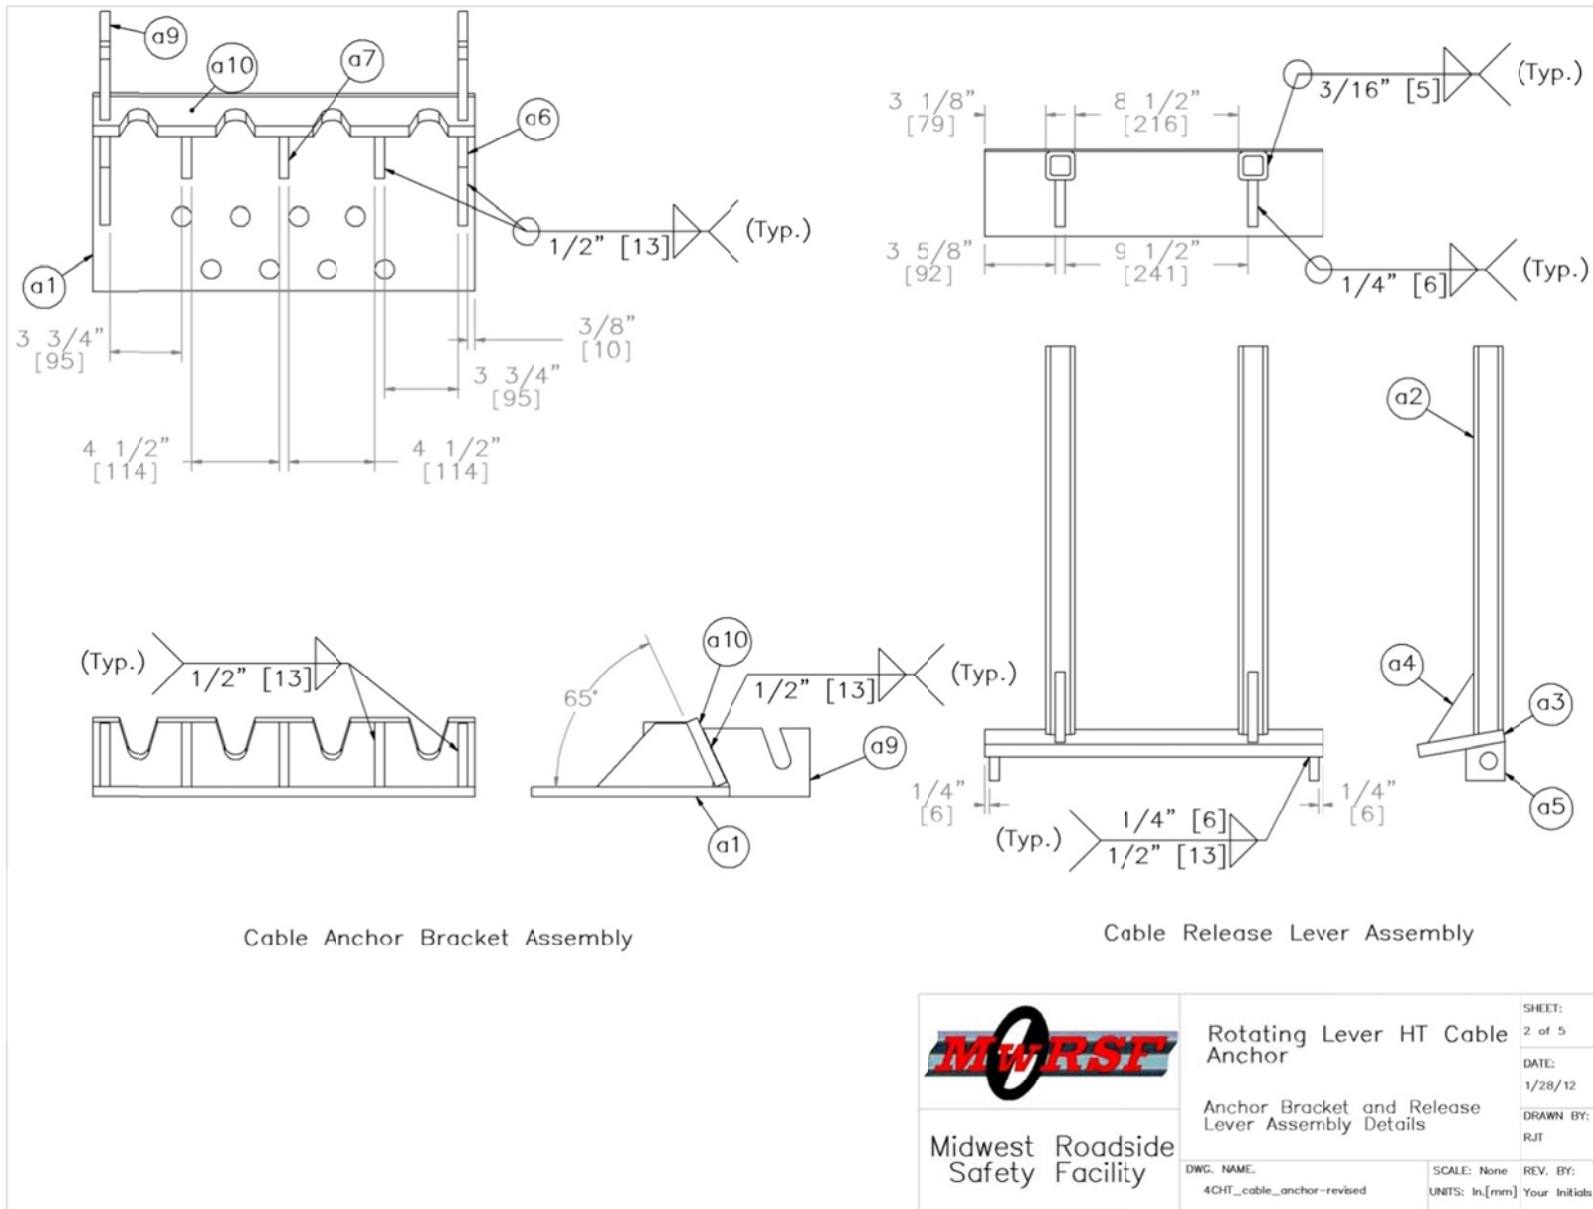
Cable Anchor Bracket and Cable Release Lever Assembly Details
